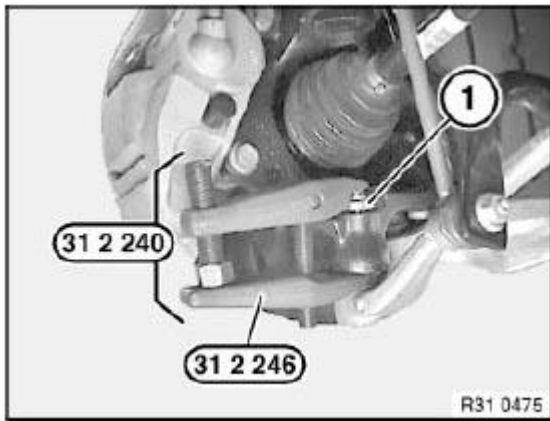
Identifying Special Tool (31 2 240) And (31 2 246)
